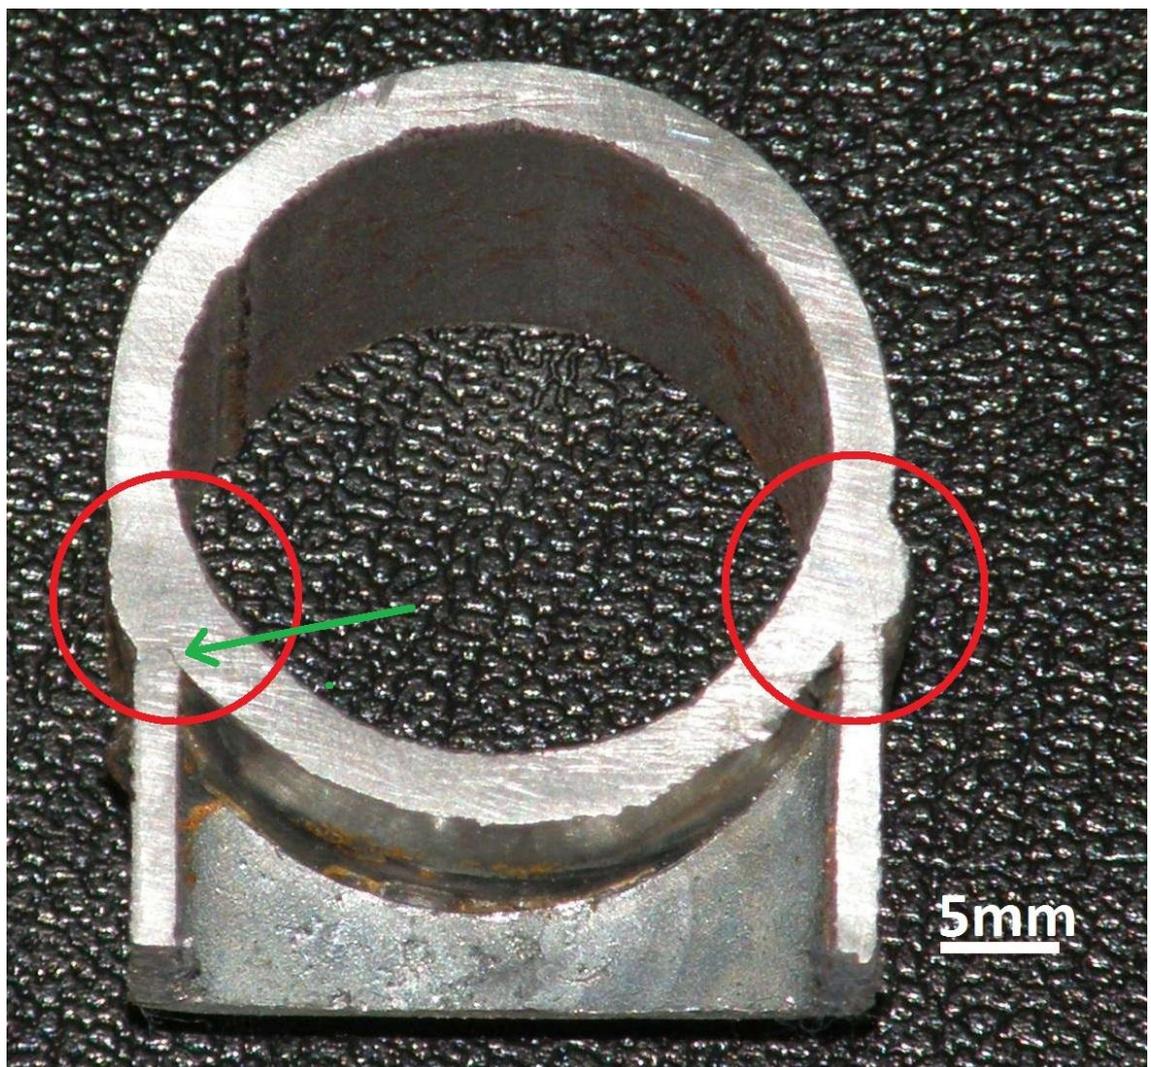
Weld sample square tube welded to roll hoop tubing. Incomplete fusion indicated with green arrow
